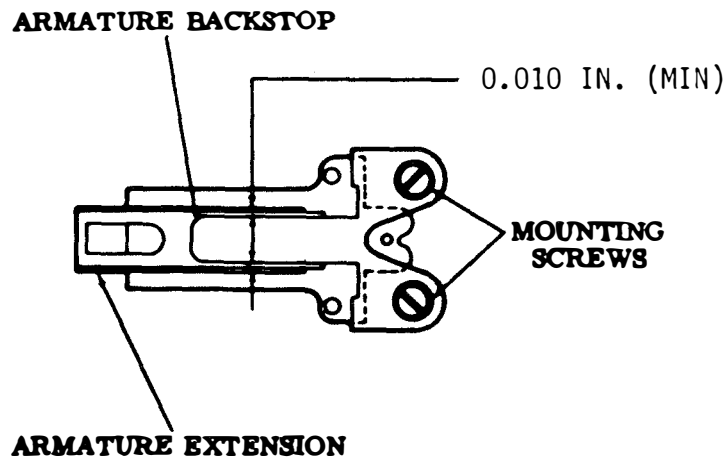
Selector Armature Backstop Alignment, Bottom View
